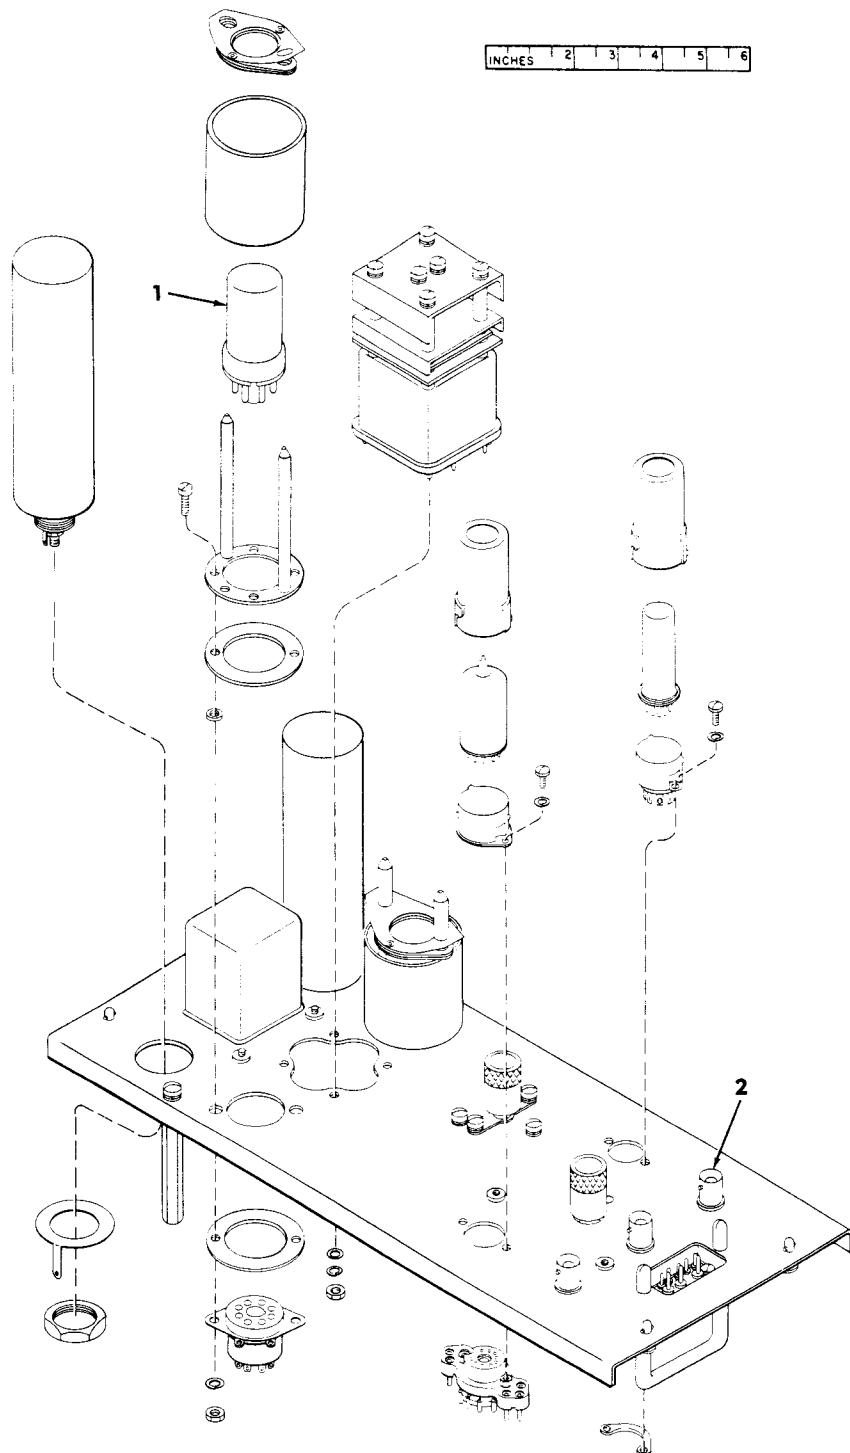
Amplifier-mixer stage (8513525) - partial exploded view
